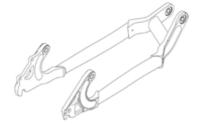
Chainstay (5) assembled with main pivot bearings (7), rear pivot bushings (22) and rear bushing inserts(23), assembled
